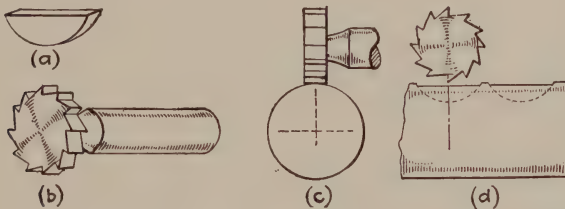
(*a*) Whitney key; (*b*) cutter; (*c*) end view of setup; (*d*) side view of setup.
